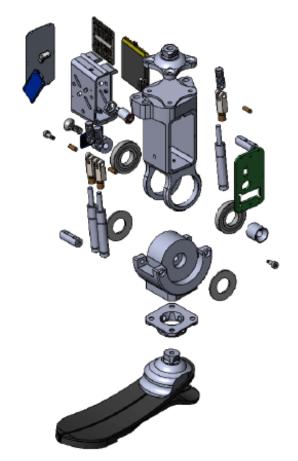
EXPLODED VIEW OF ANKLE PROTOYPE
